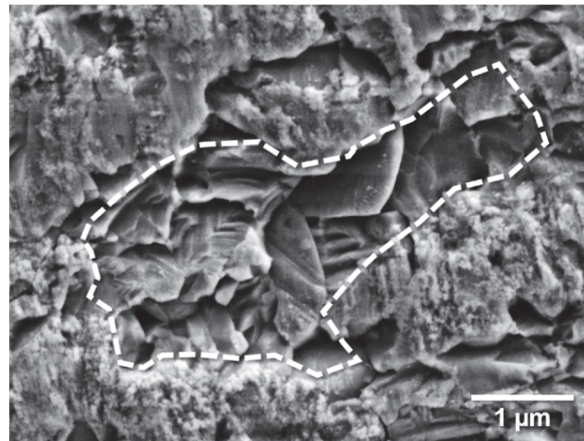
Adhesion-free patch (encircled area) of worn TiCN coating surface after machining the stainless steel [82].
